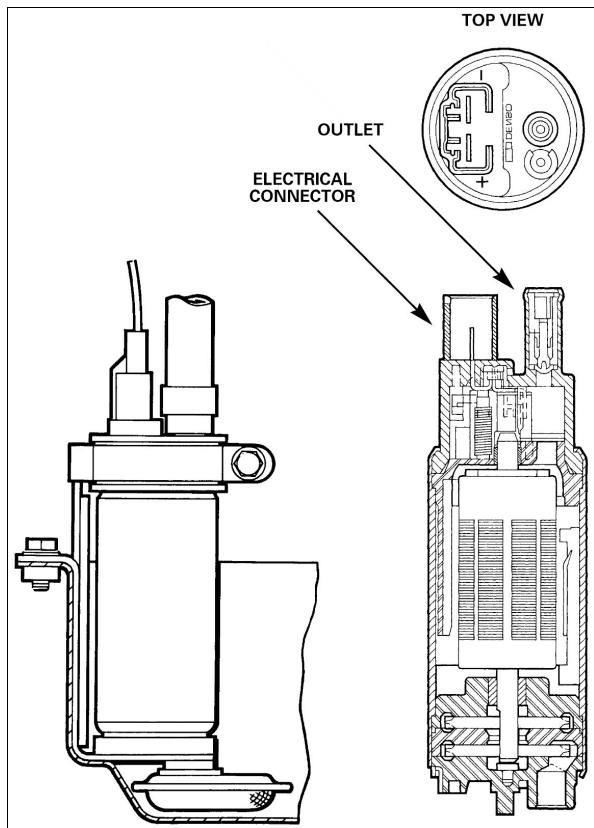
FUEL PUMP WITH CROSS-SECTION
